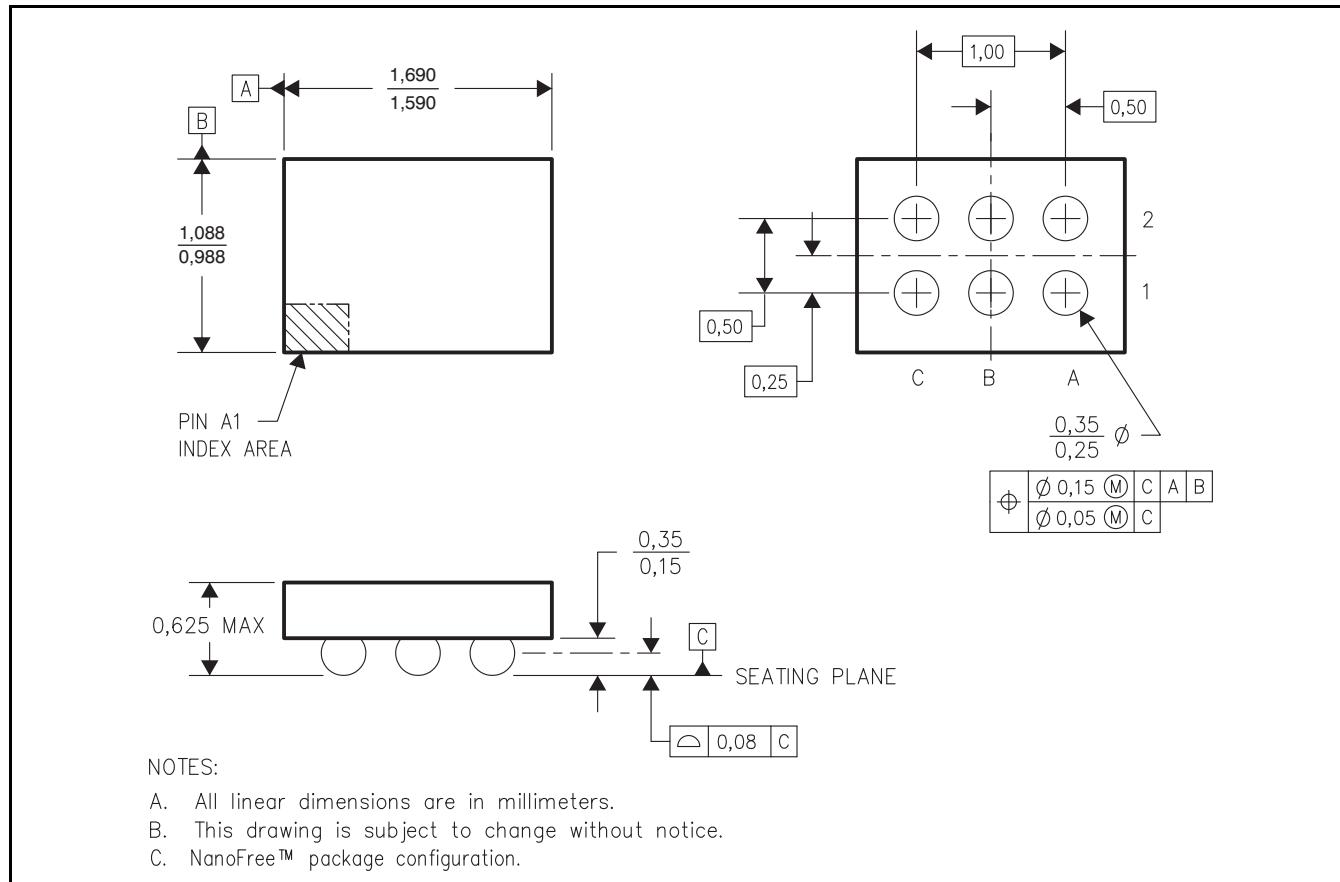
YZC Wafer Chip-Scale Package Dimensions (in mm)
